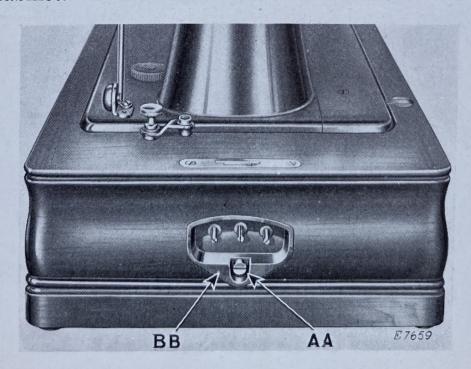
TO DETACH THREE-PIN TERMINAL BLOCK
